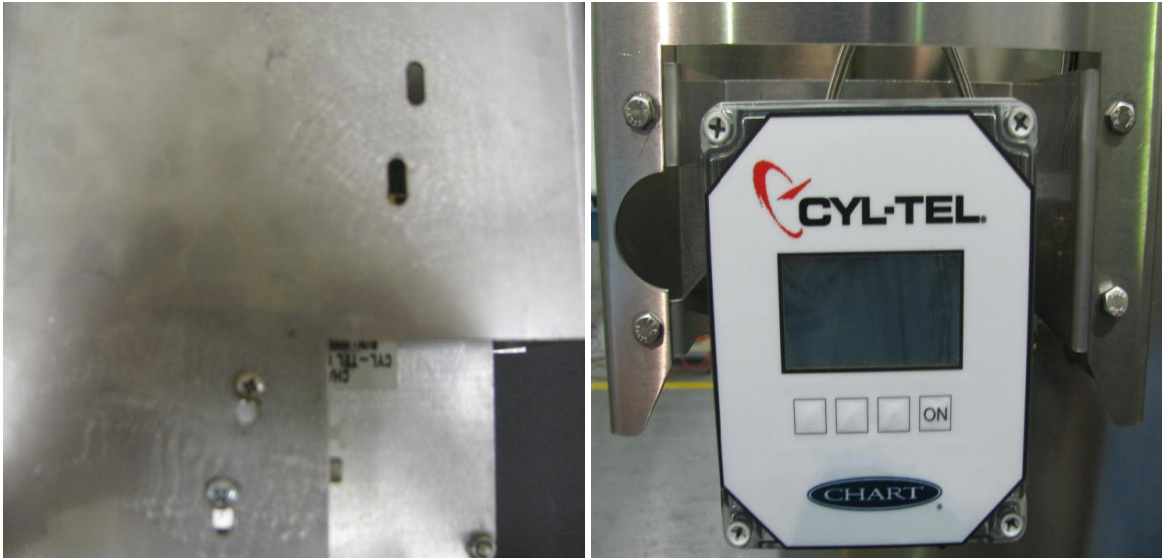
A) Bulk mounting bracket secured to the DP sensor block. B) CYL-TEL III installed onto tank with the mounting bracket.
